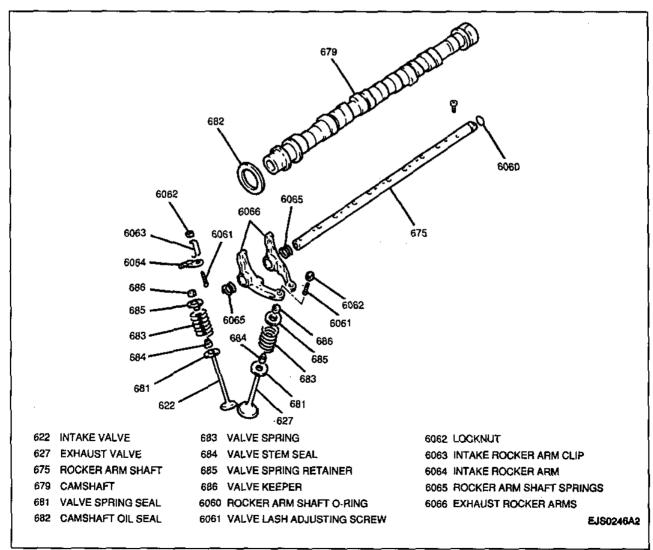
Rocker Arms, Rocker Arm Shaft and Carnshaft
